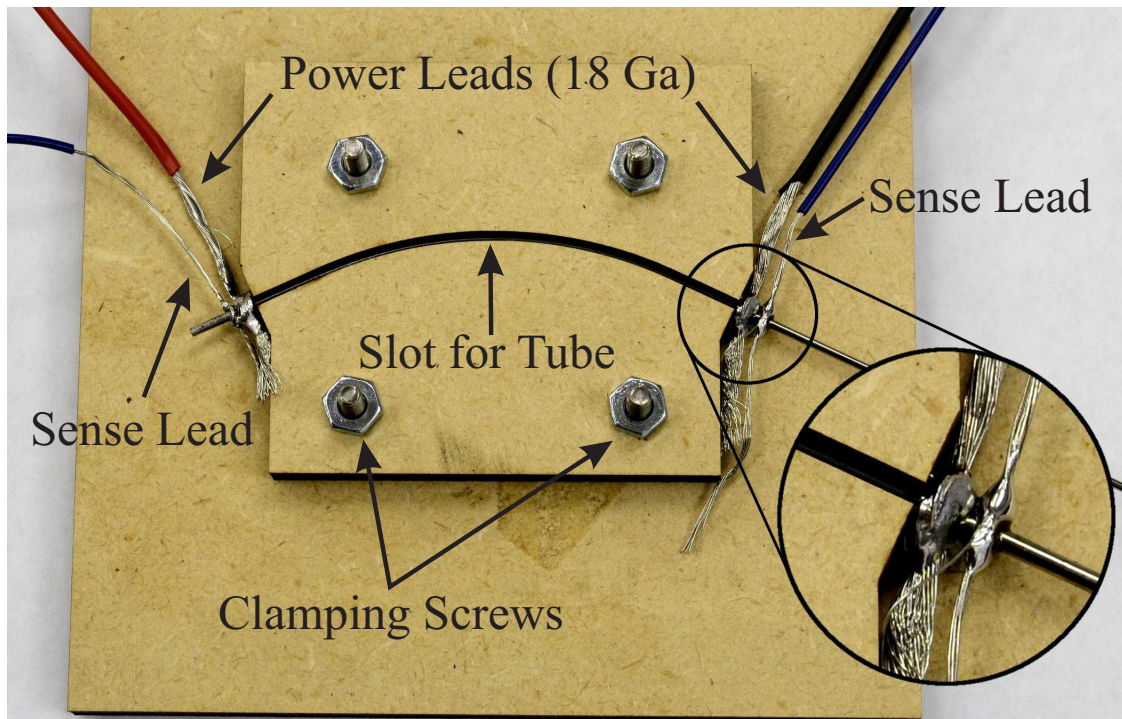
This fixture made of MDF was cut by a CNC laser cutter. The slot for the part is made to accommodate the diameter of the tube which it was designed for, accounting for the kerf width of the laser cutter. Wires are tied in an overhand knot and filled with solder to improve electrical contact.
